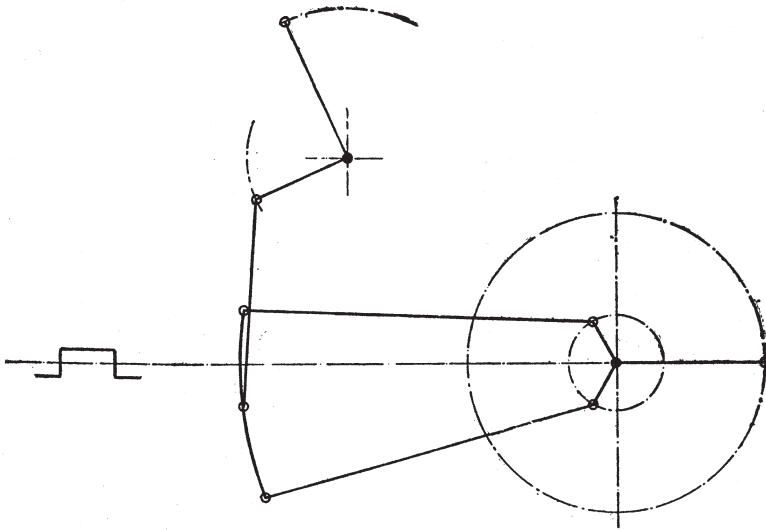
Stephenson Valve Gear—Variable Lead.
